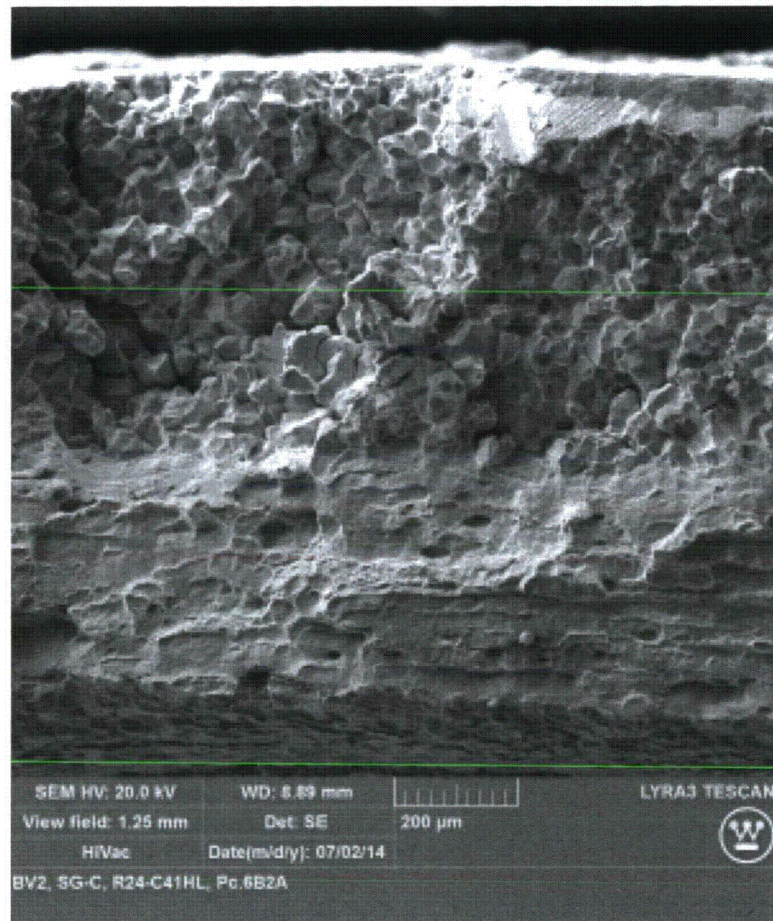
Example of R24C41-6B Burst Opening Fracture Surface
